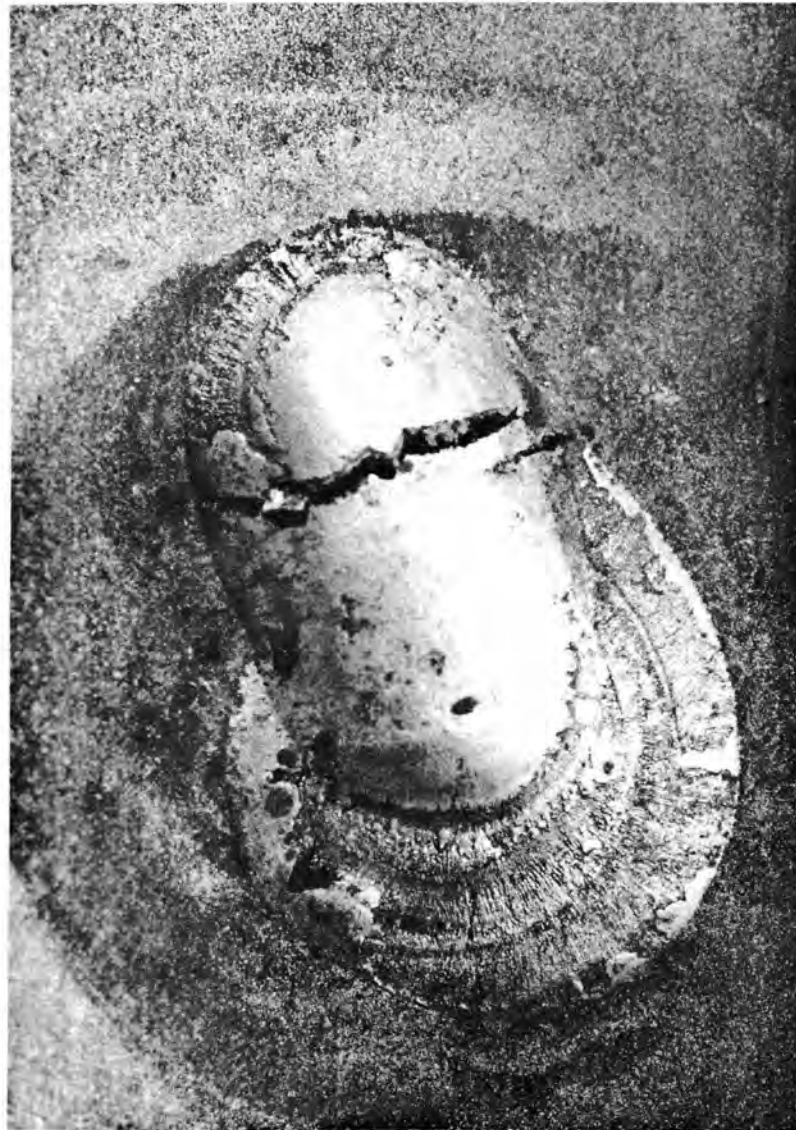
(Y-13310) Underside of Improperly Attached Thermocouple Weld Showing Crack.
